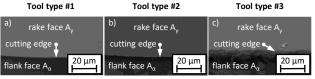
Different NPD turning tool types; a) A.L.M.T. CORP.,
